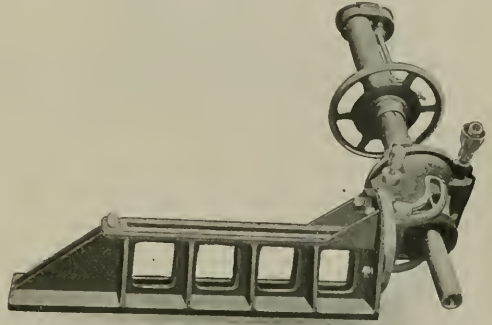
Large Size Portable Milling and Drilling Tool.
